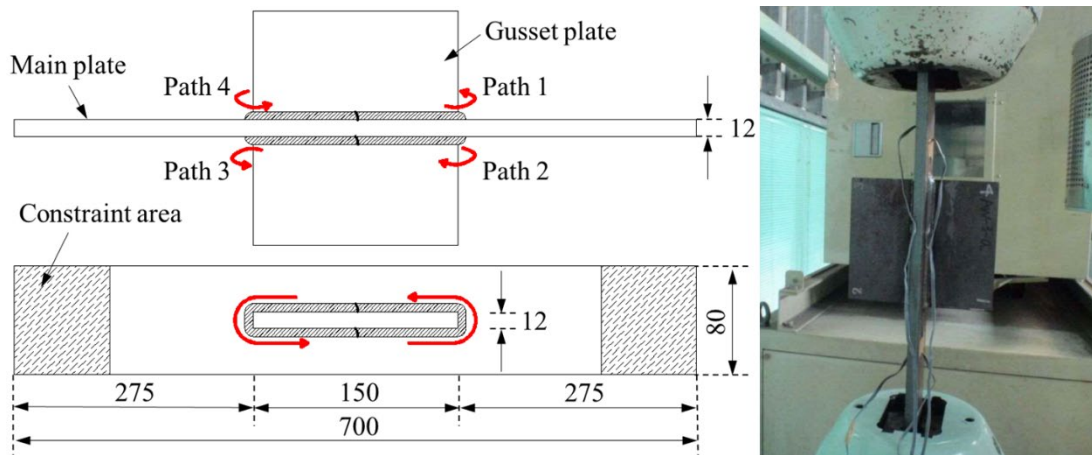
General geometry, welding condition and loading scenario of out-of-plane gusset welded joints specimens (unit: mm)
